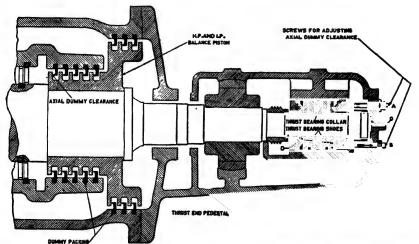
Showing dummy pistons and adjustable bearing, Allis-Chalmers turbine.
